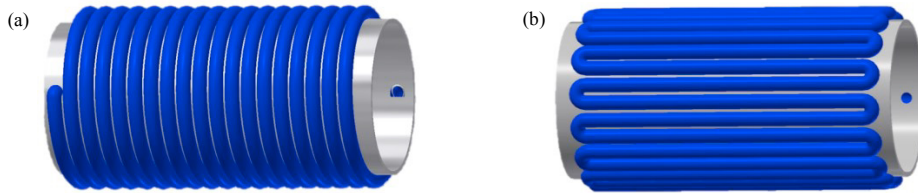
Fluid inerter external tube configurations of (a) helical arrangement and (b) meander arrangement.
